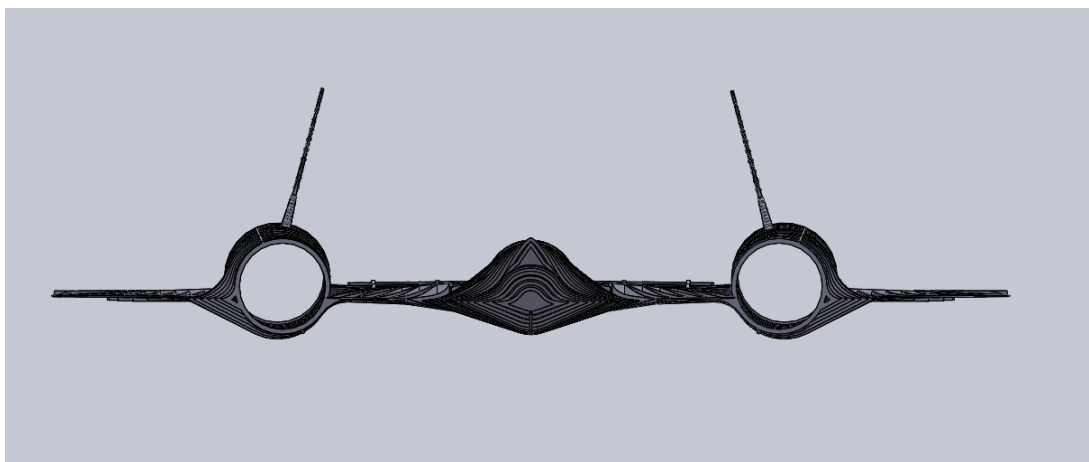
Full 3D CAD structure of the Lockheed SR-71 (front)
